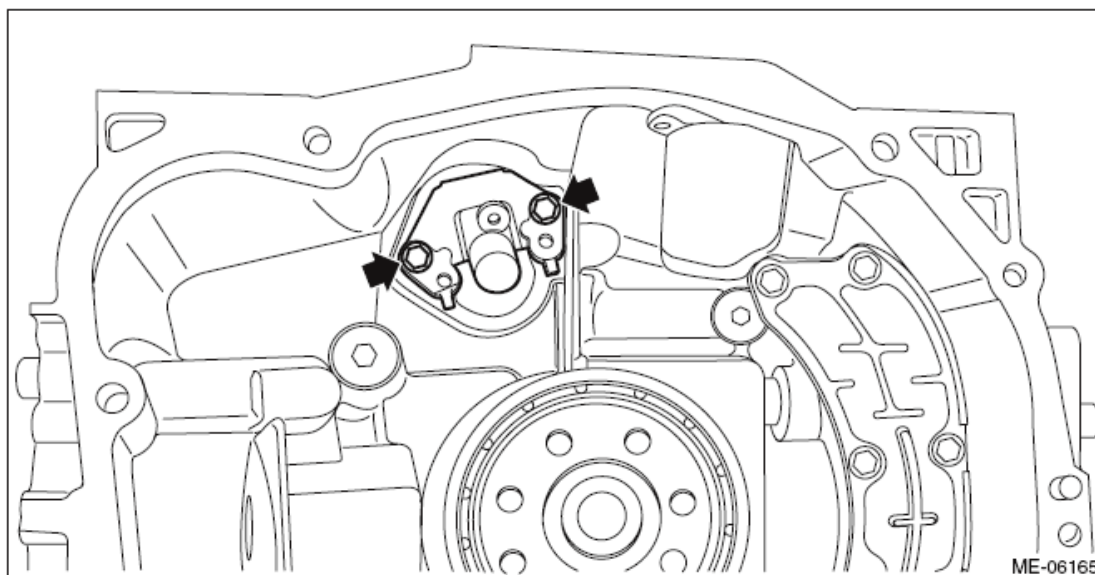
Locating Crankshaft Position Sensor Holder Bolts
